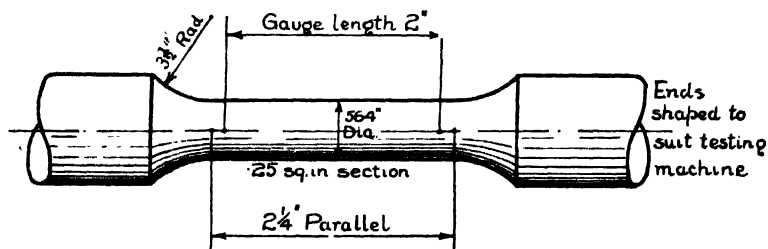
B.E.S.A. standard test specimen for aluminium casting alloys.
